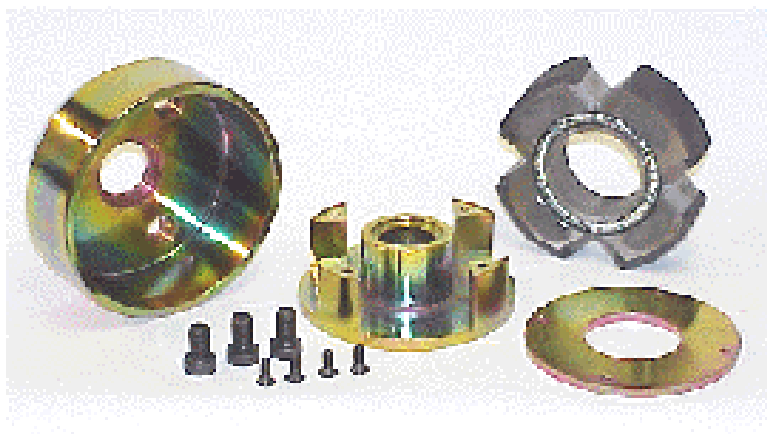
This centrifugal clutch takes the place of the flywheel and rubber doughnut in the model “C” gearbox. Unit disengages below 2500 rpm. For easy starts and smooth idles. Not a Rotax factory product.
